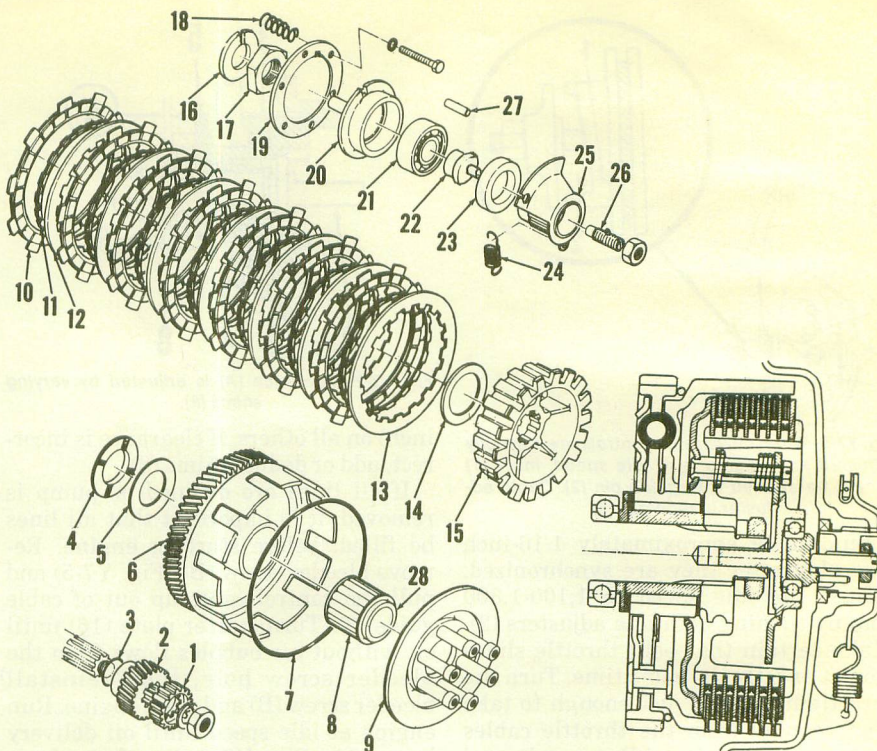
Exploded view of the clutch assembly. Inset shows cross section of clutch.
